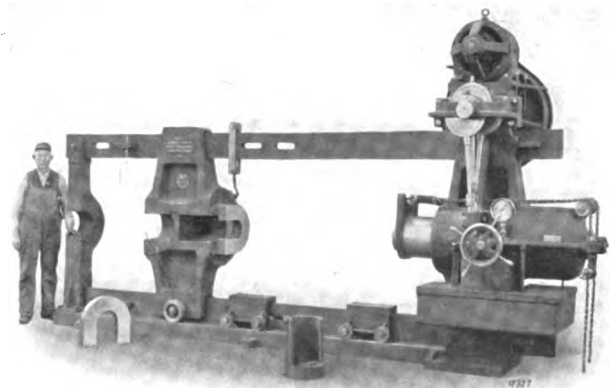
48-Inch (1219 mm.) 400-Ton (360 t.) Hydraulic Wheel Press
